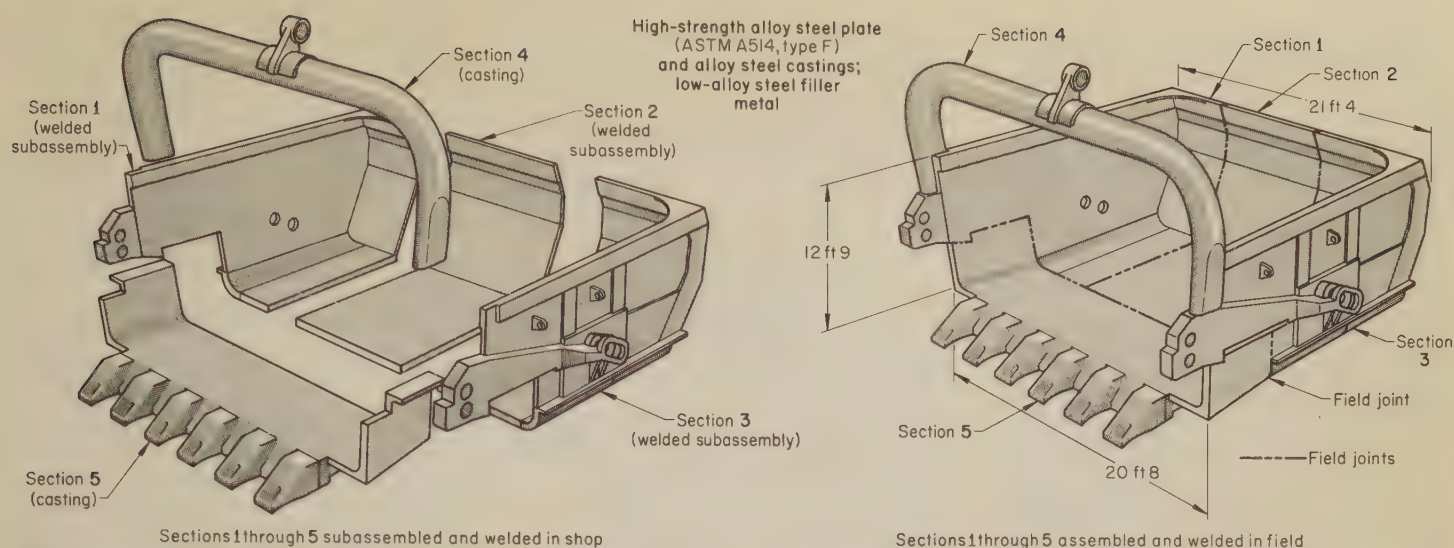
Dragline bucket that, because of size and weight (158 tons), was produced as five shop-welded subassemblies that were shipped to location for field assembly and final welding. In both shop and field welding, flux-cored arc process was used for flat and horizontal positions, and shielded metal-arc for out-of-position, short, or difficult-access welds. (Example 199)
